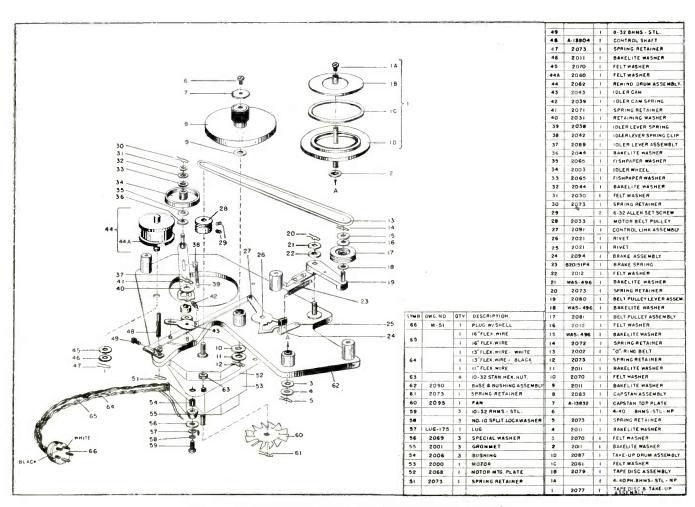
Exploded view of Bell Model RT-65 tape recorder.
